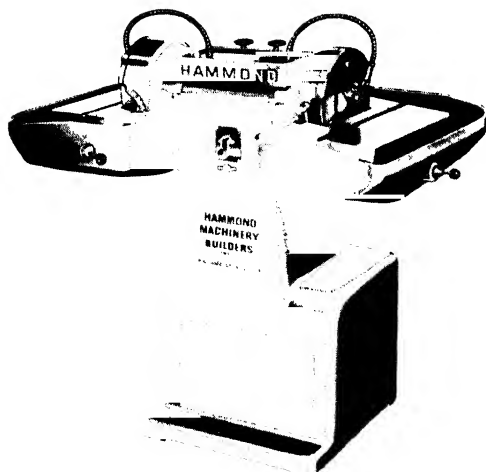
This Grinder May Be Used for the Offhand Sharpening of Tools
